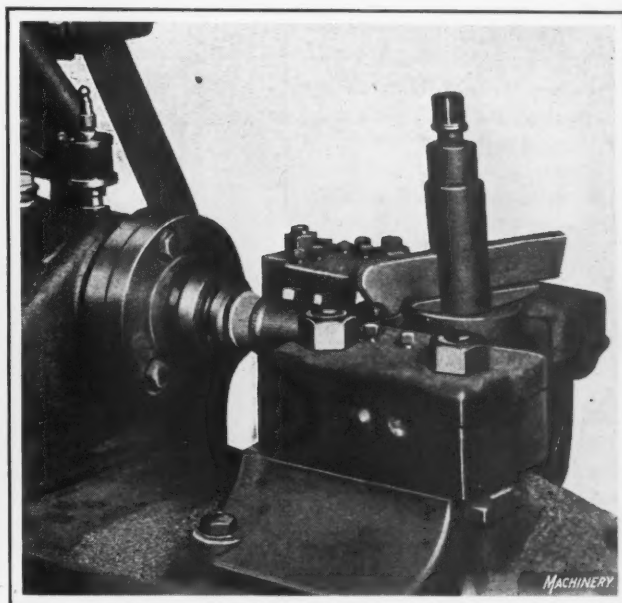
Machine Set-up employed for the Third Operation on the Tappet Guide
